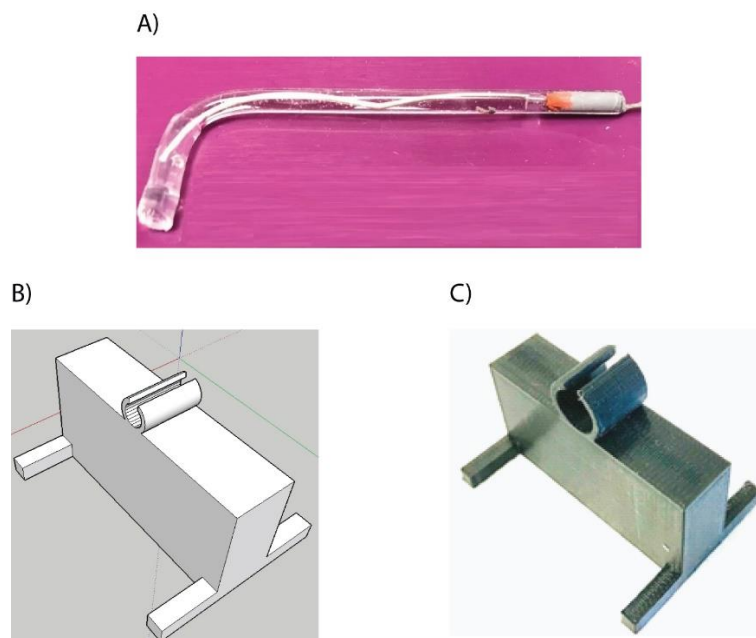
A) Assembled Ag/AgCl L-shaped reference electrode, filled with 3M KCl and closed by porous frits. B) 3D CAD of the reference electrode holder. C) 3D printed PLA used as a reference electrode holder.
